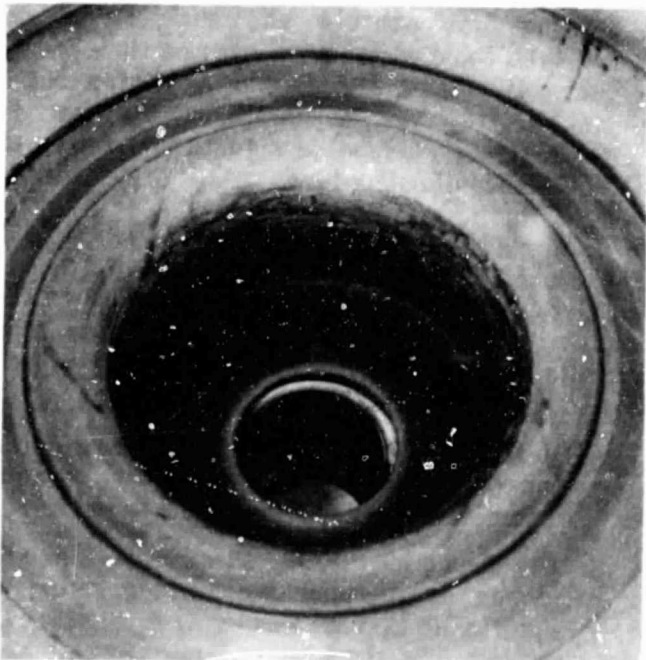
Turbine Shroud Shows Radial Rub from Turbine Rotor.
